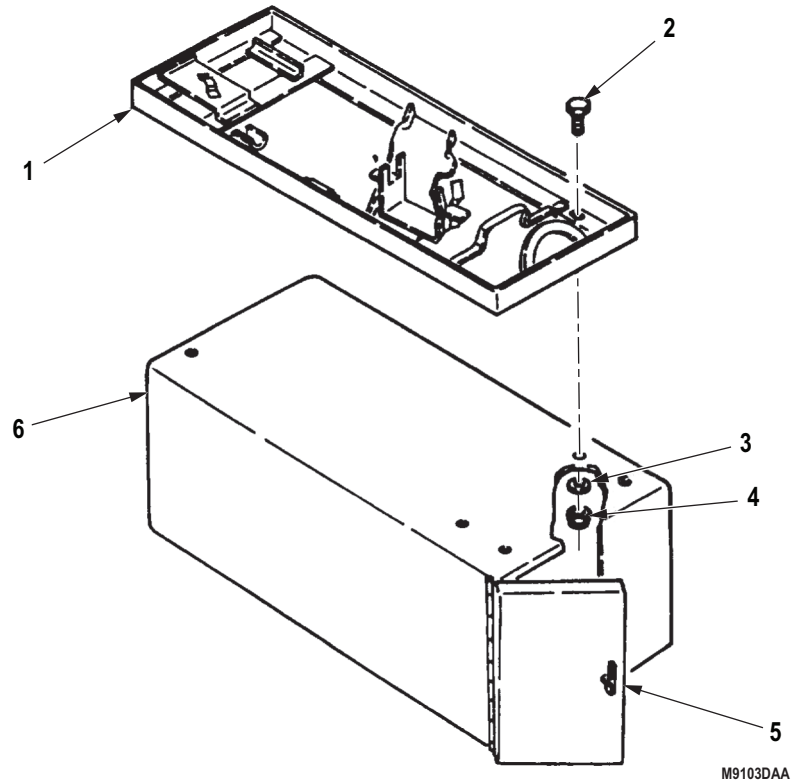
Pioneer Tool Kit Mounting Bracket Removal.
